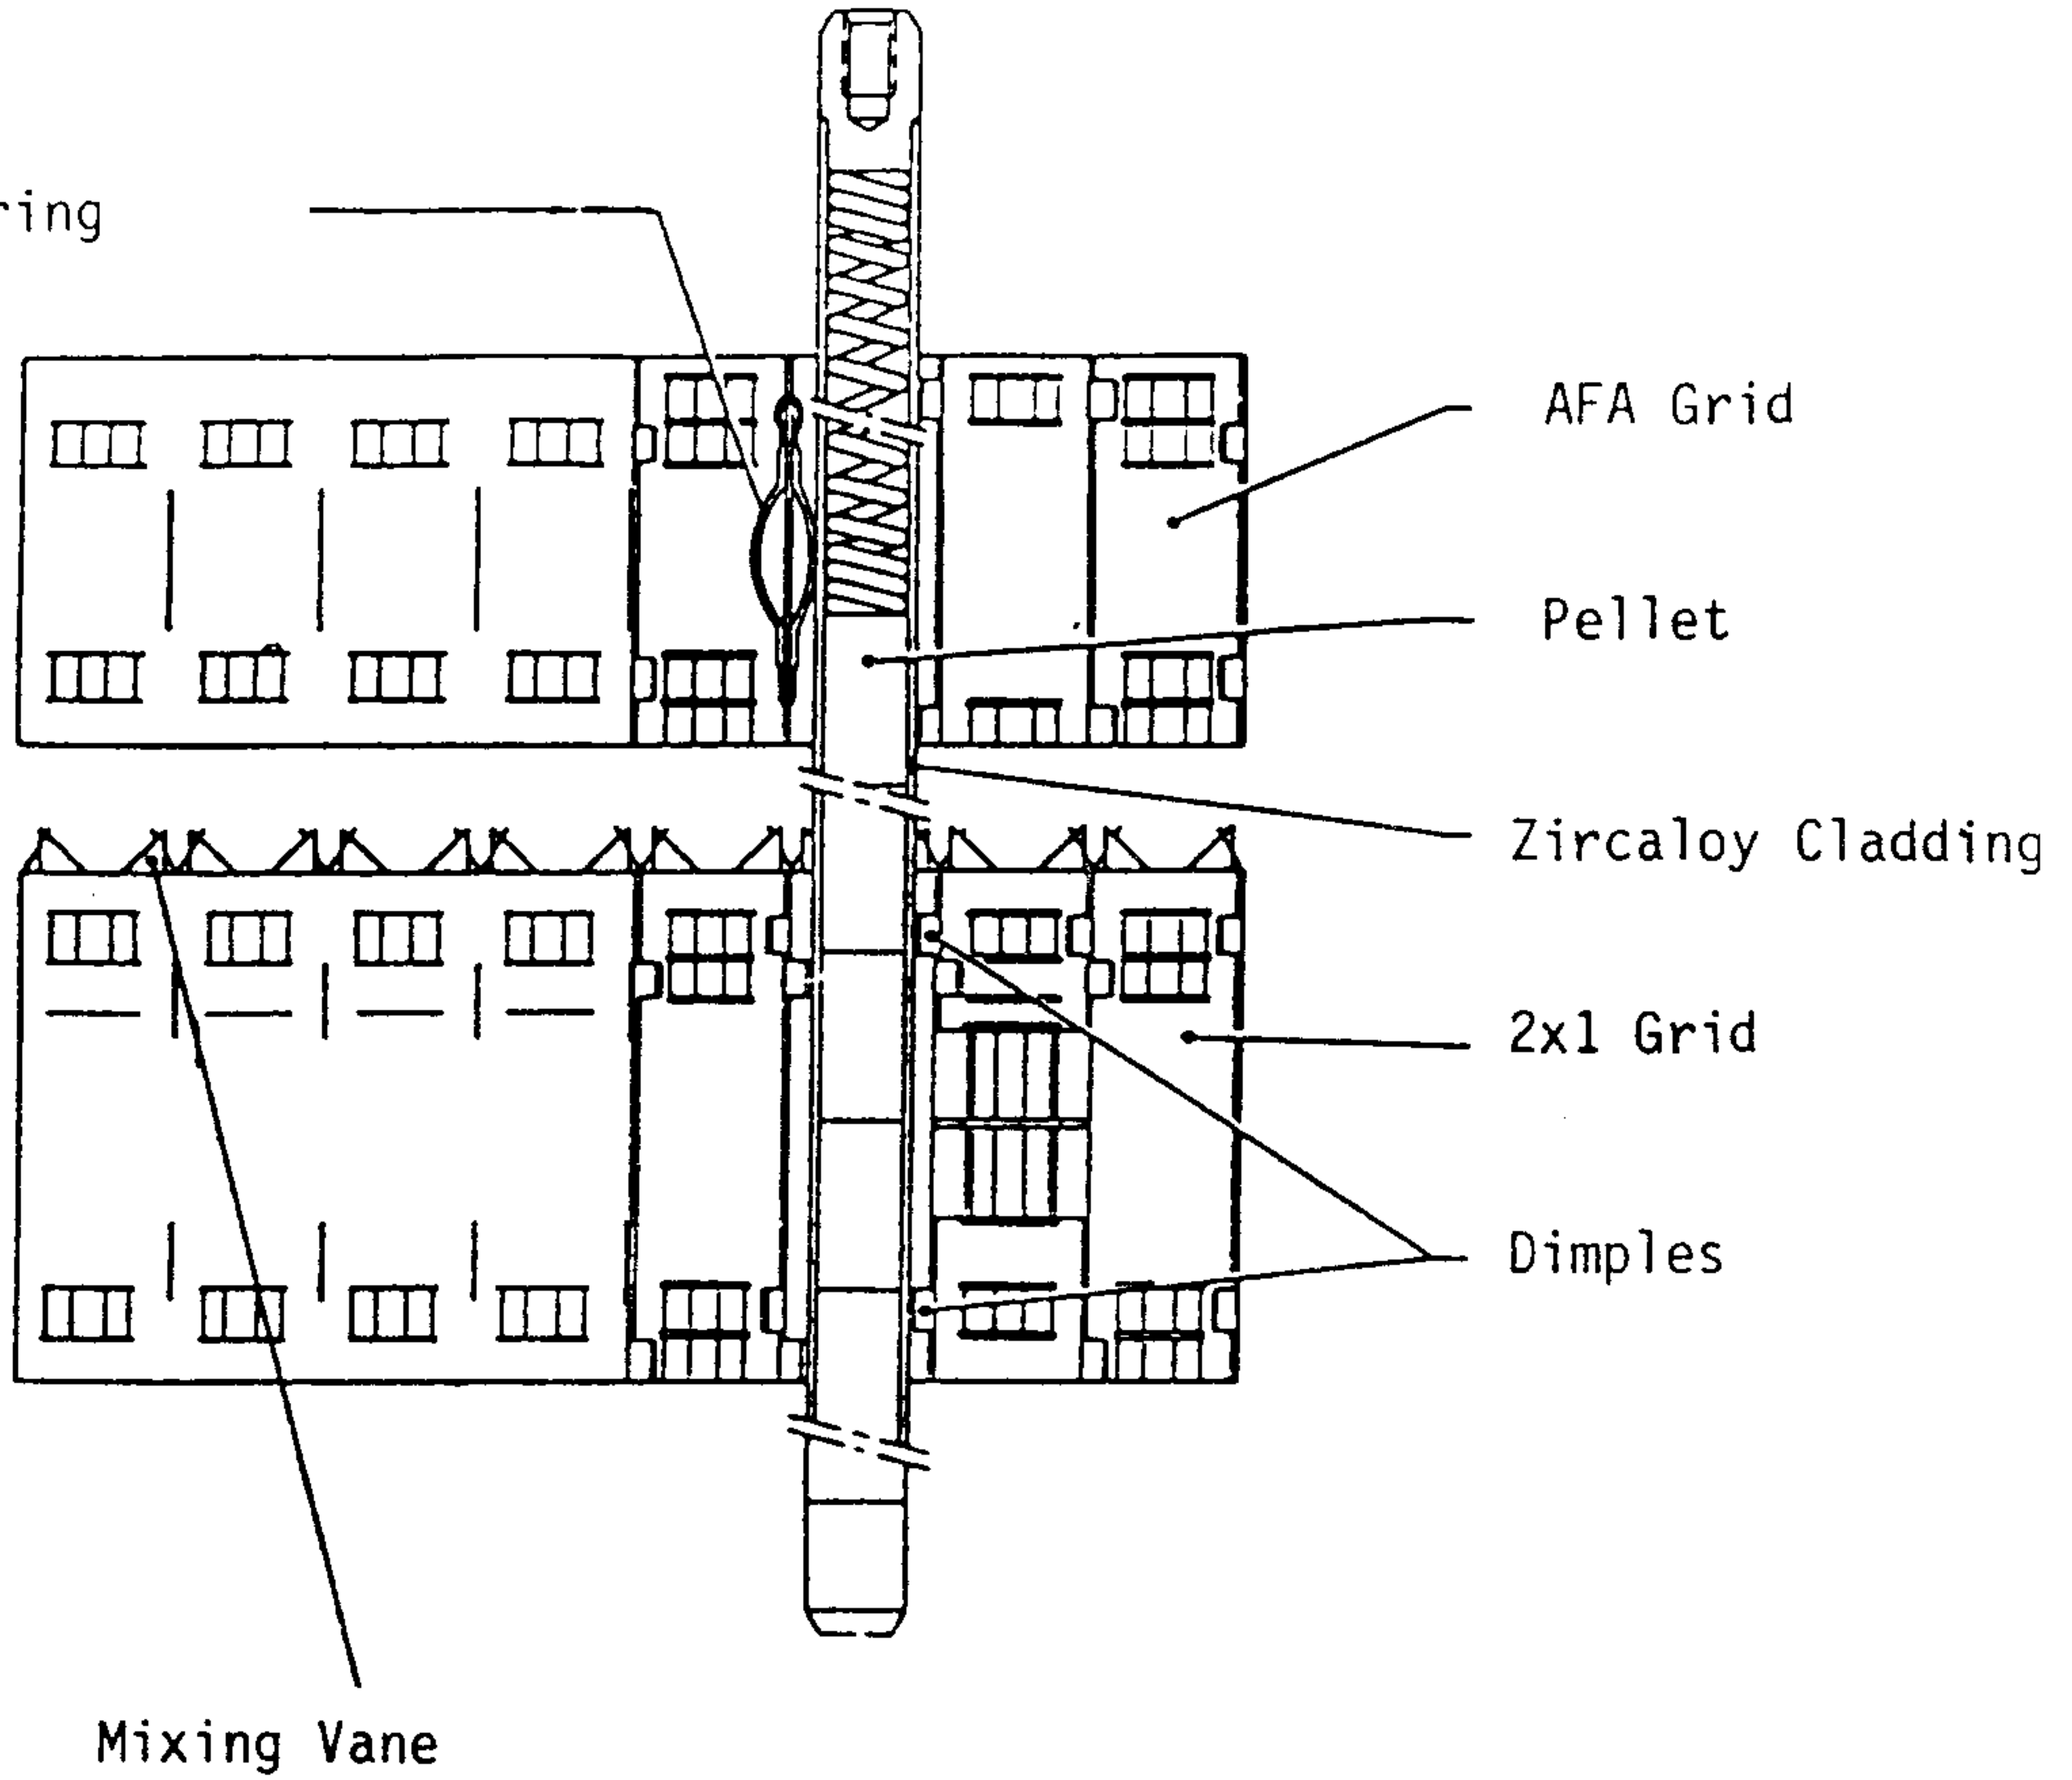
2x1 Type of Spacer Grid for X1 Type of Fuel Assembly
